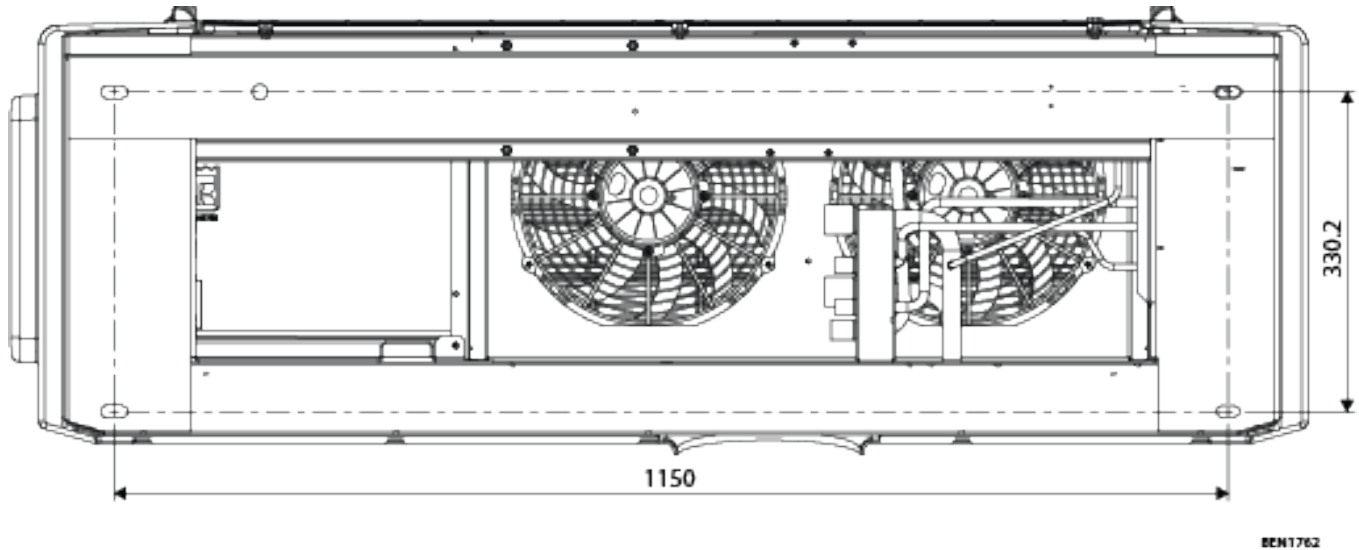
Condenser Roof Top Mounting/Access Hole Locations (V-800/V-1000)
